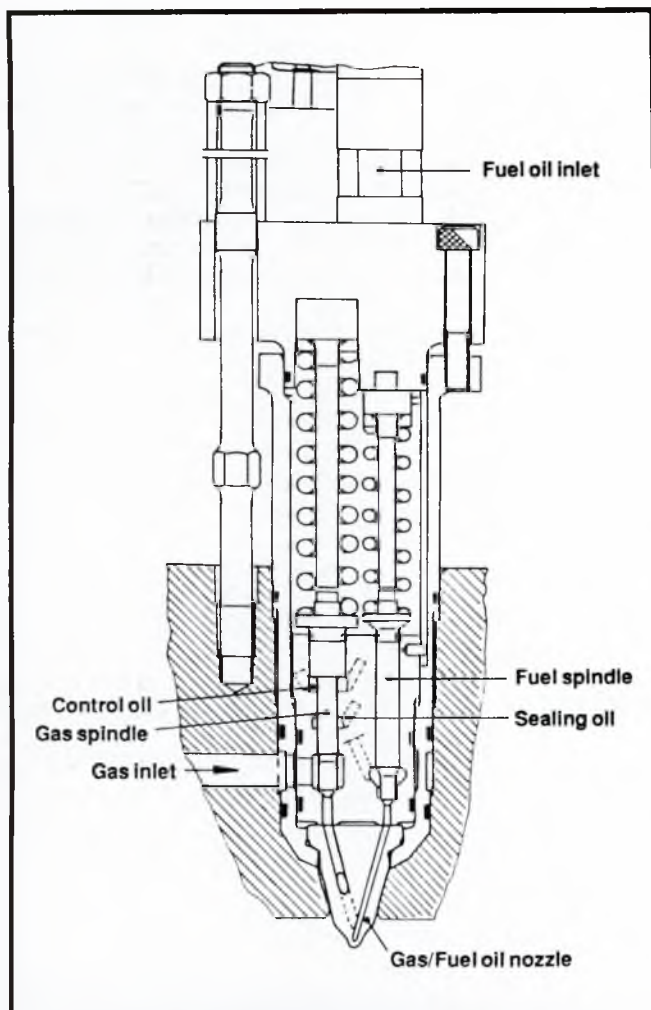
Actual design of a combined fuel oil/gas injection valve for an L35MC engine
